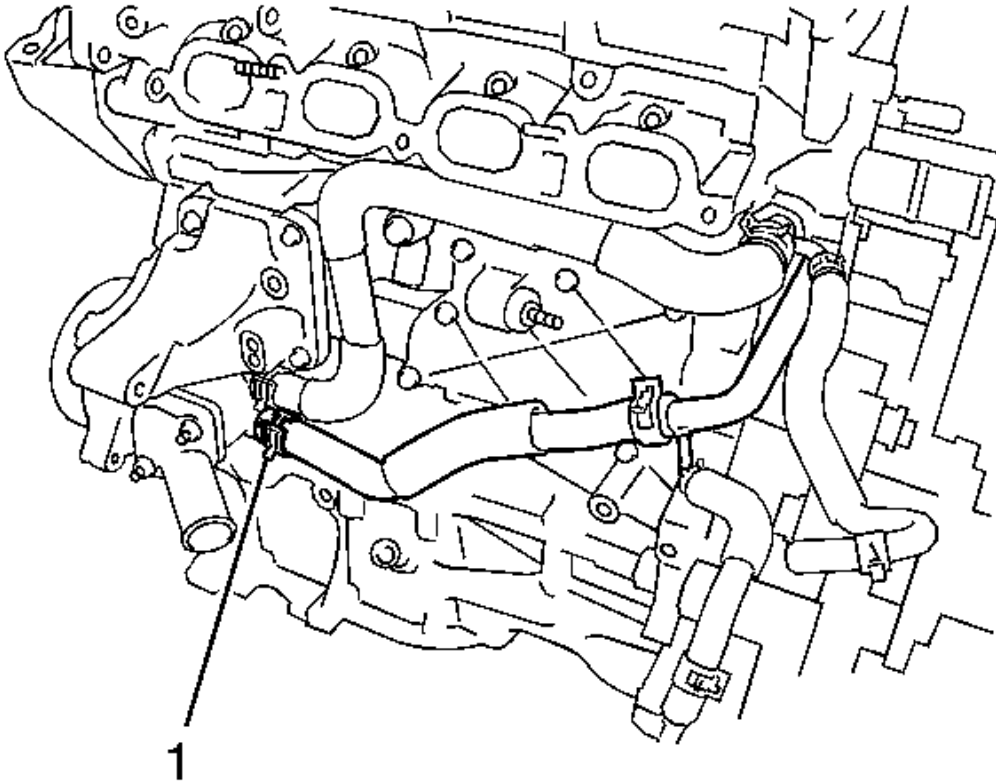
Identifying By-Pass Hose & Water Inlet Housing
